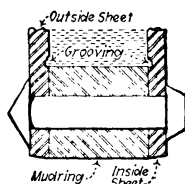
Grooves corroded, at edges of mud-ring, in sheets of horizontal fire-box boiler.
